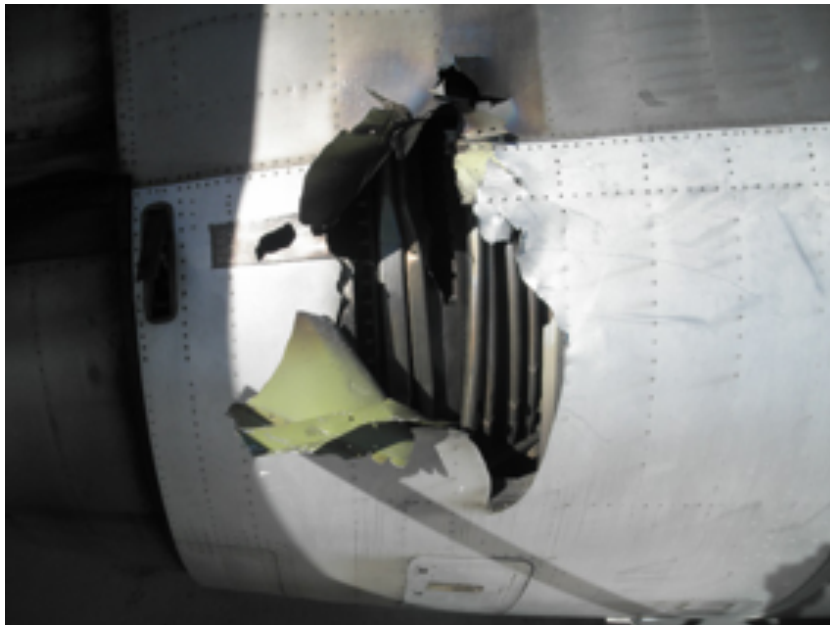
Photograph of the larger hole in the reverser cowling of the no. 3 engine
